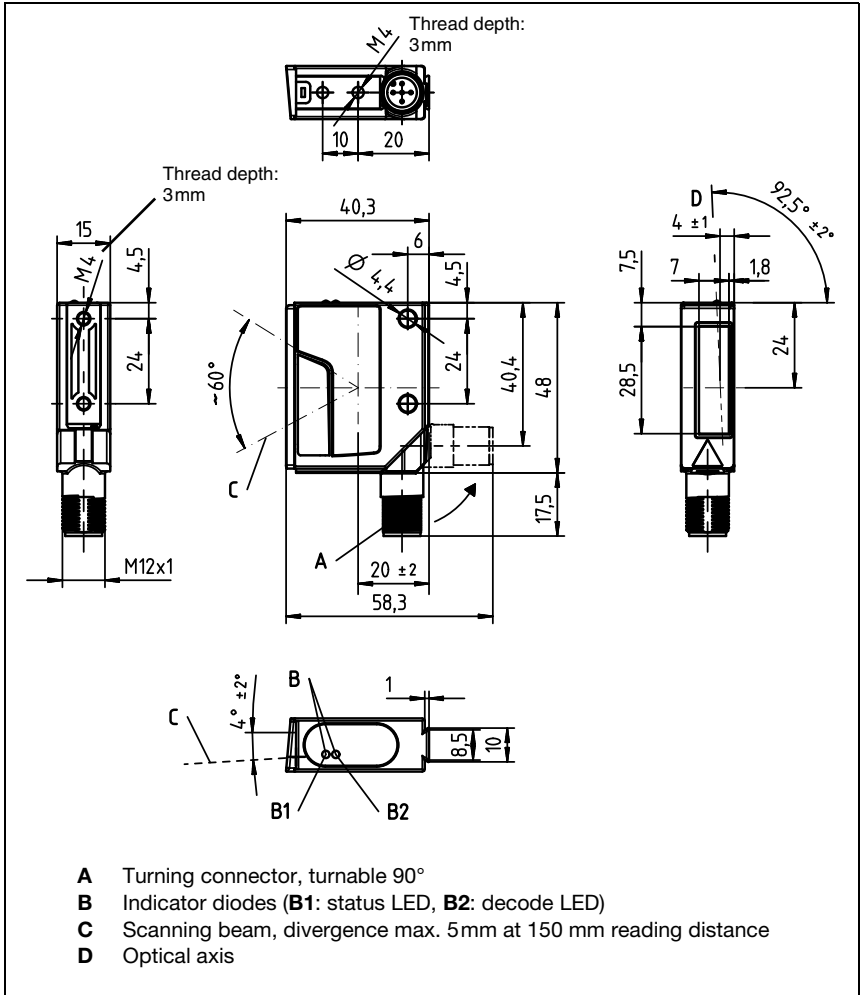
BPS 8 SM 102... dimensioned drawing
